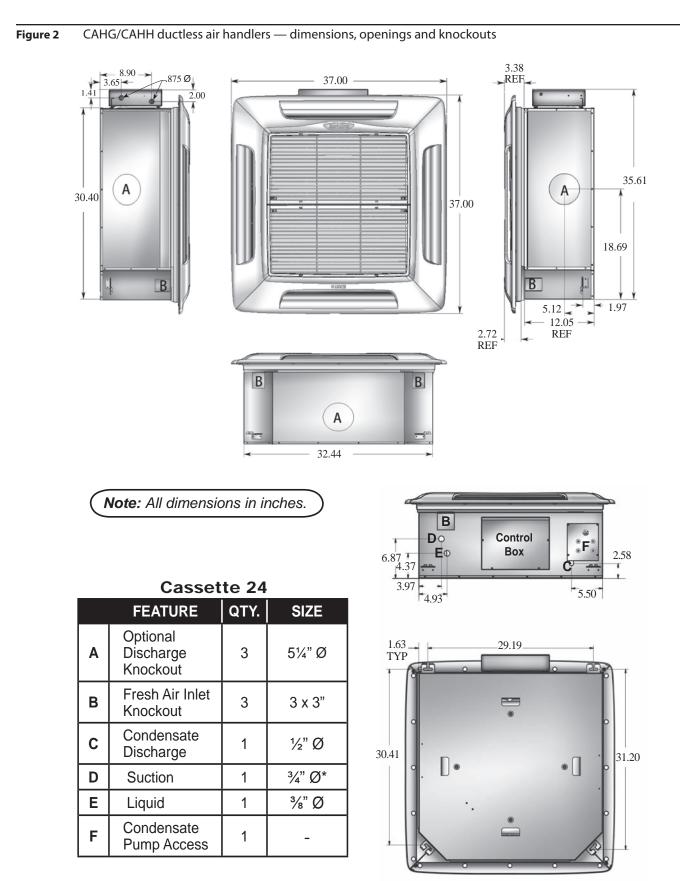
CAHG/CAHH ductless air handlers — dimensions, openings and knockouts
